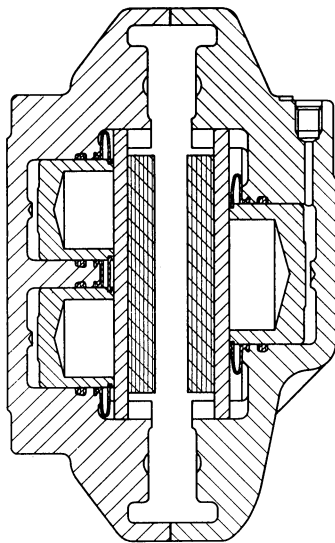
Front caliper - Sectional view across pistons, lining pads and backing plates.
